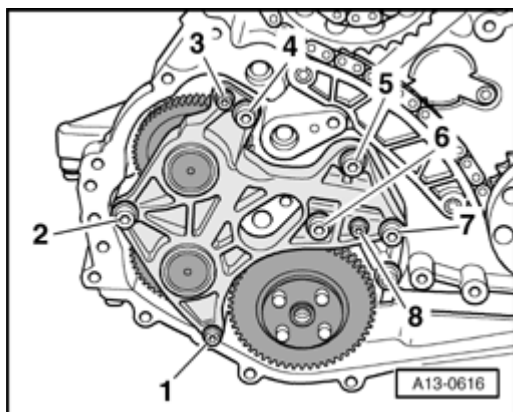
Removing Bolts & Spur Gear Unit Rear Bearing Cap
